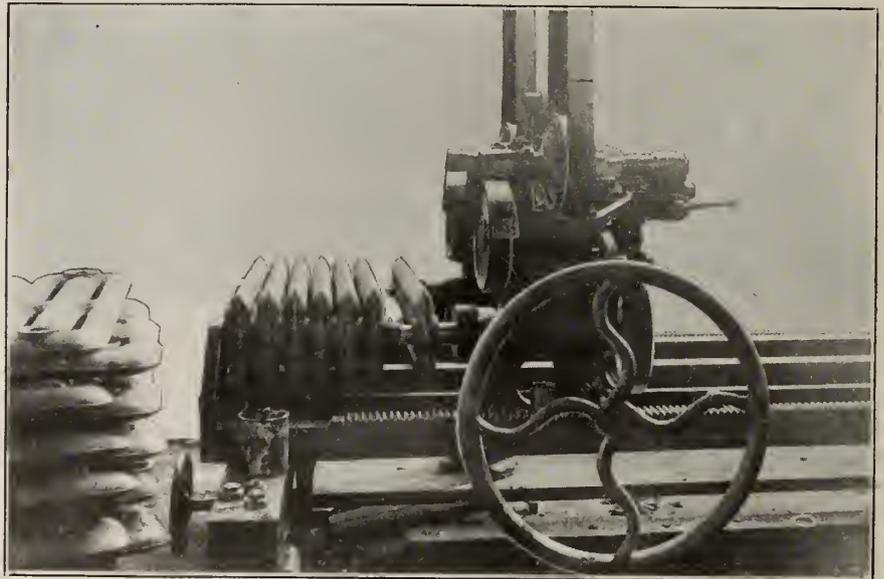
RADIATOR ASSEMBLING MACHINE.
